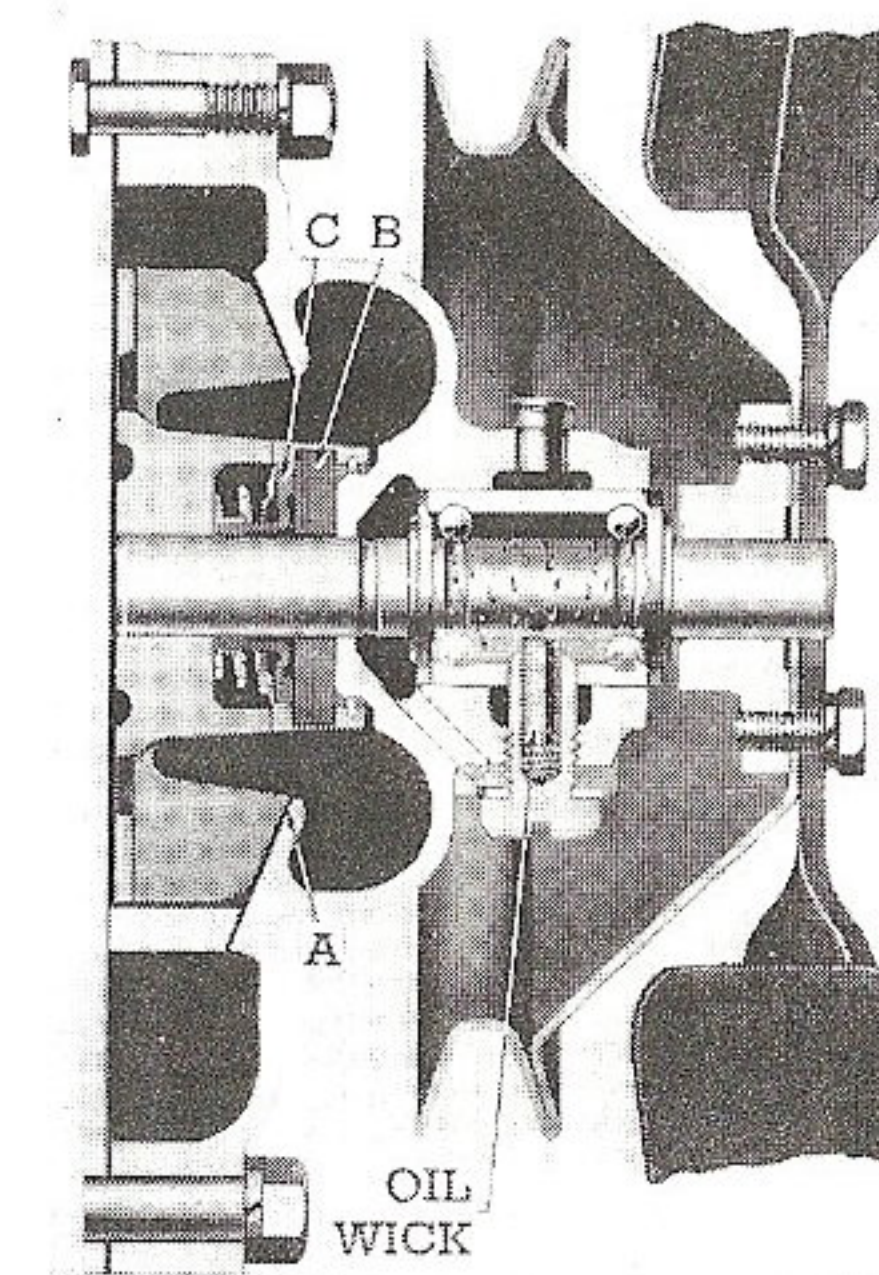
(Right)—Water Pump is of the Packless Type Utilizing a Spring Loaded Sealing Element
